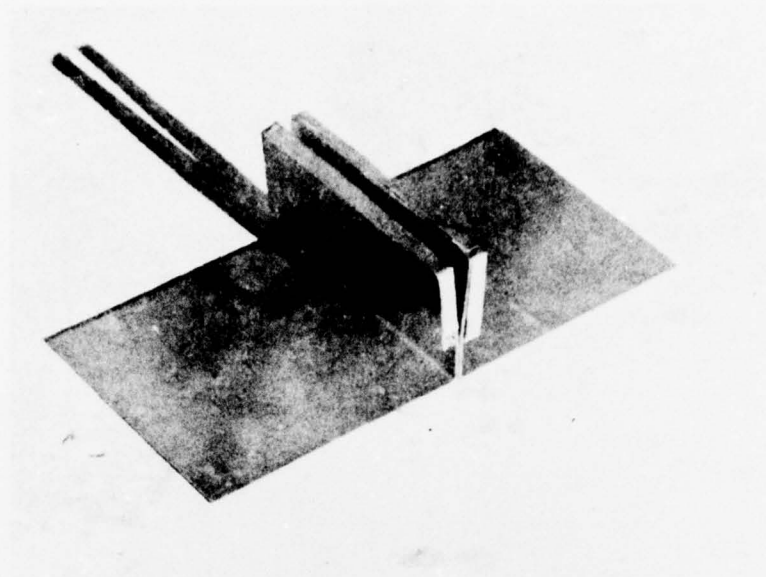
Longitudinal Seam Weld Made Using the Symmetrical Impulse Technique
